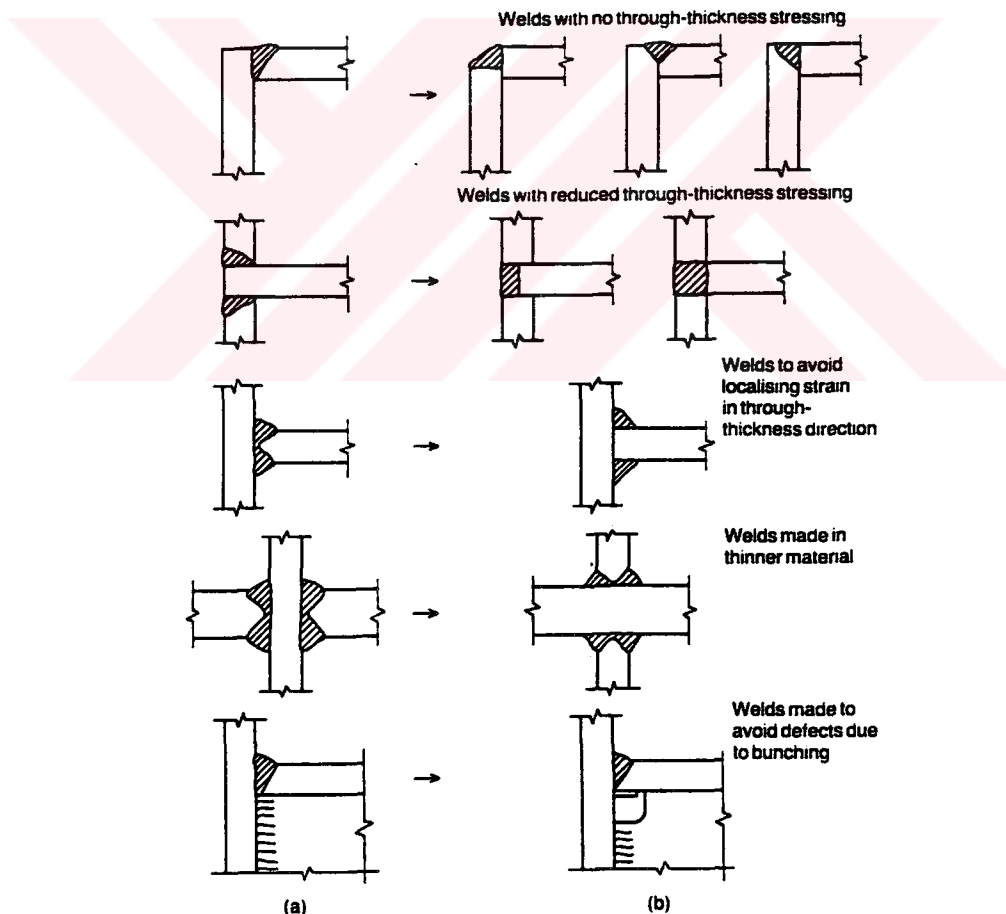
Weld Details to Avoid Lamellar Tearing (a) Not Recommended (b) Recommended [2]
